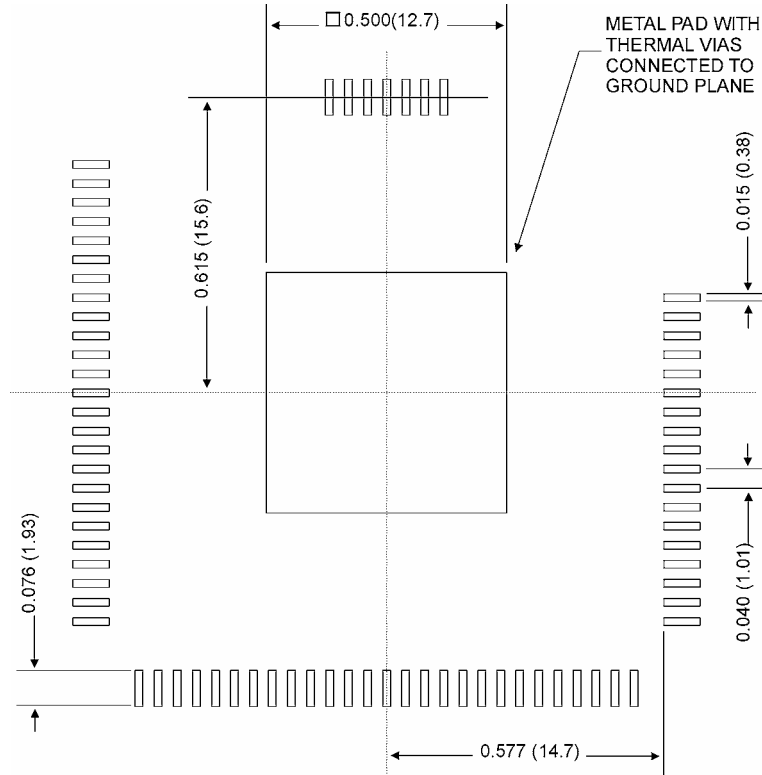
RDA012M4MS-HD footprint, dimensions shown in inches (mm).
